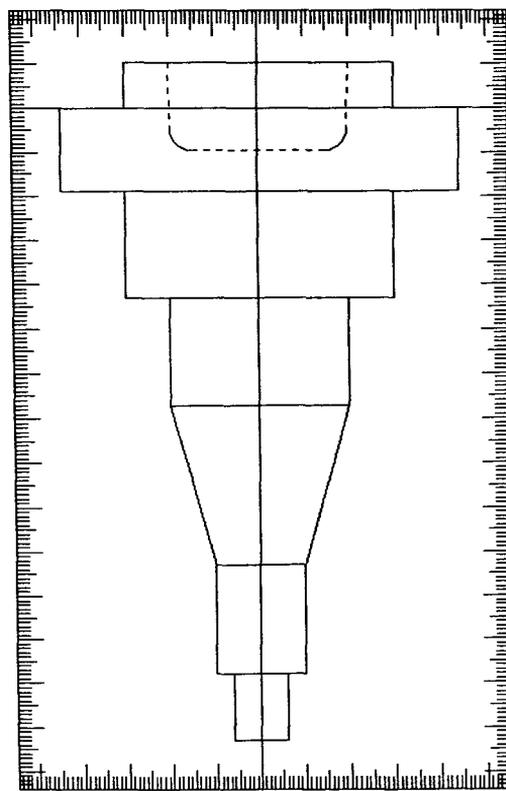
Stub Axle, WFM 2059 (machined part)
